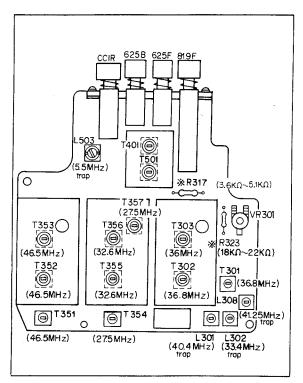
Adjusting parts location of VIF and SIF adjustment
